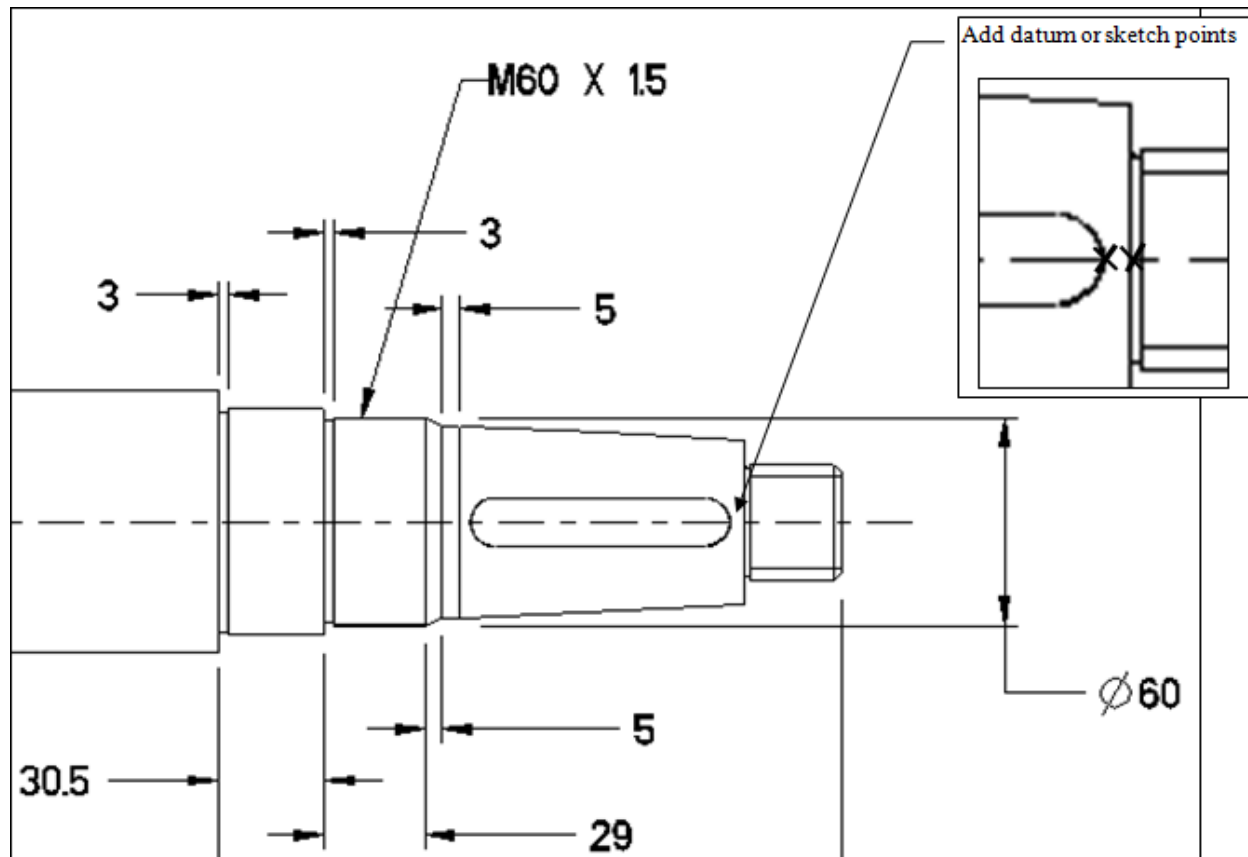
Coupling Shaft Drawing, Sheet One, Top View, Right Side
